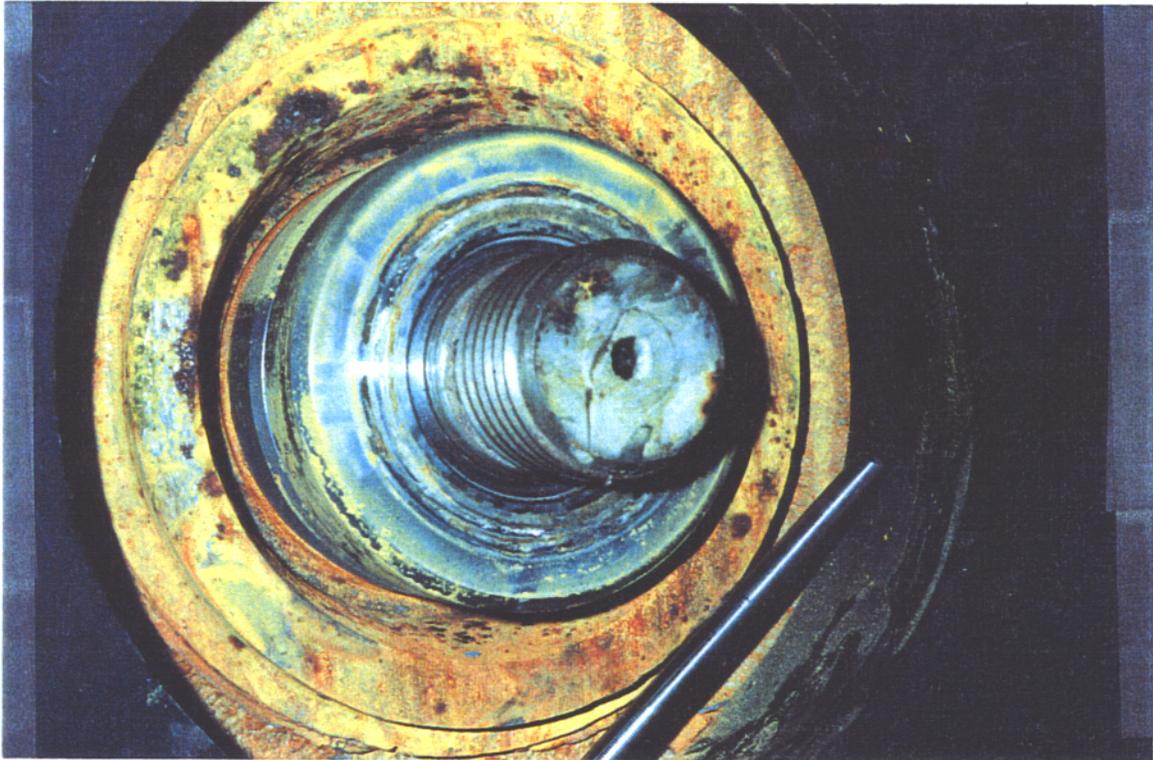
Gypsum Draw-off Pump Seal Plate Adapter
